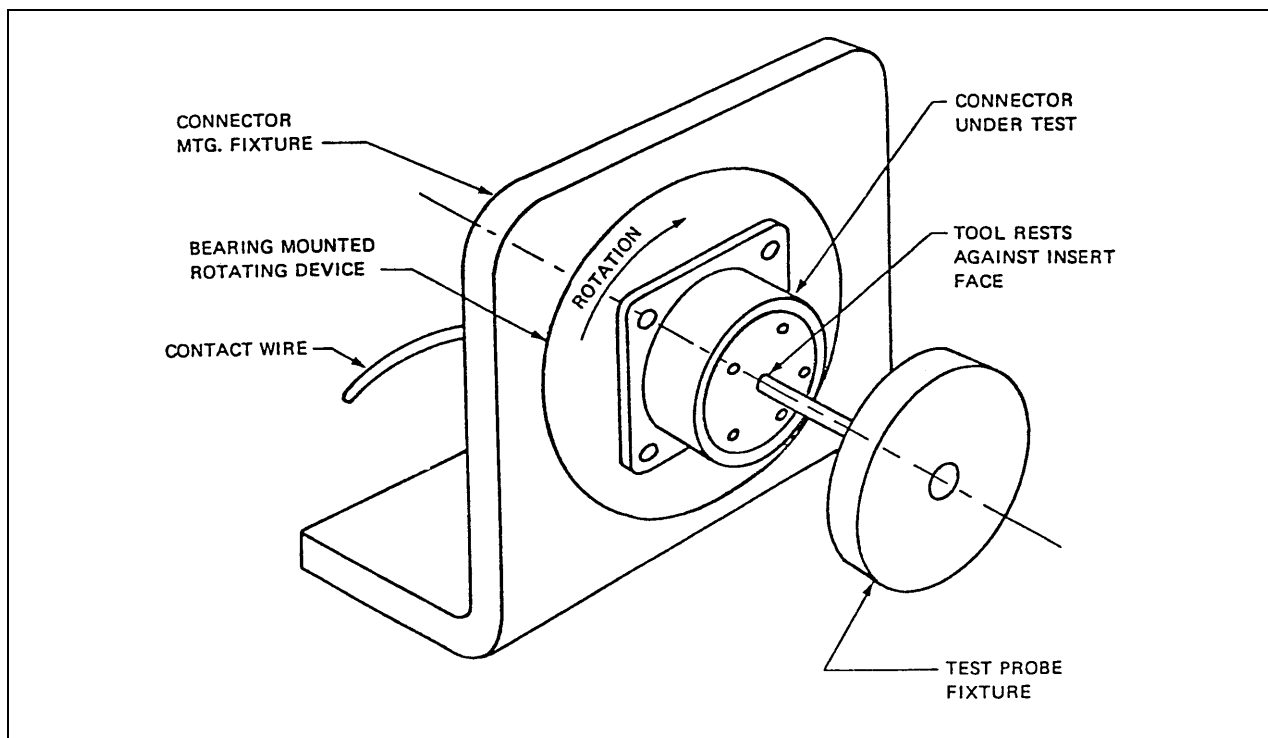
Apparatus for testing nonremovable socket contacts within the connector
